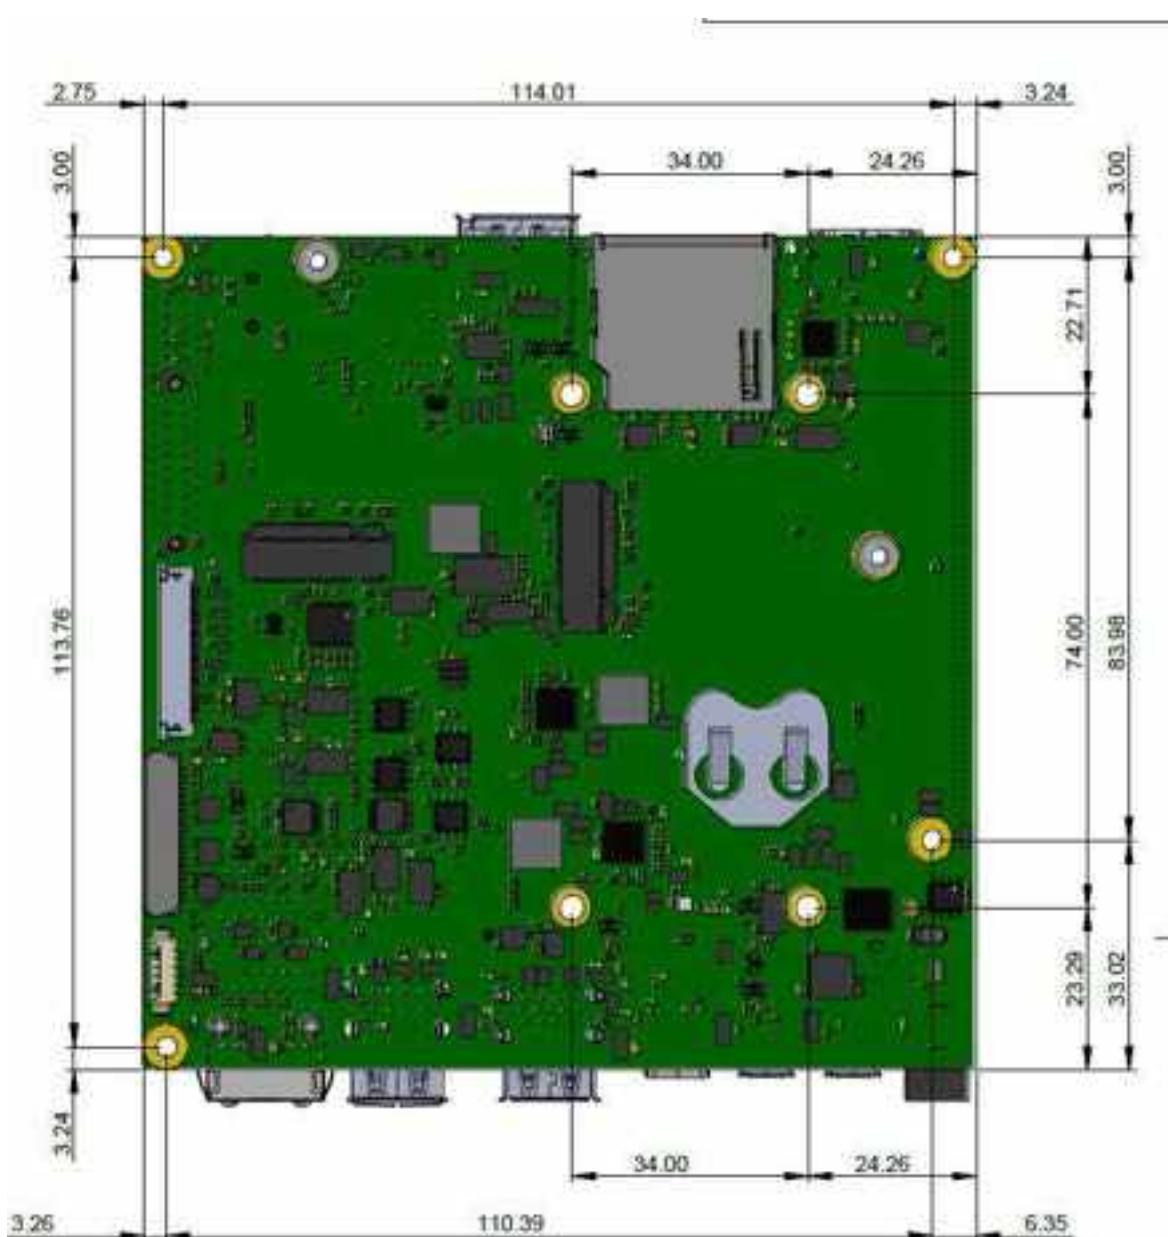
Mechanical dimension of i.MX 8M Plus Q/QL/D SMARC Carrier Board- Bottom View
